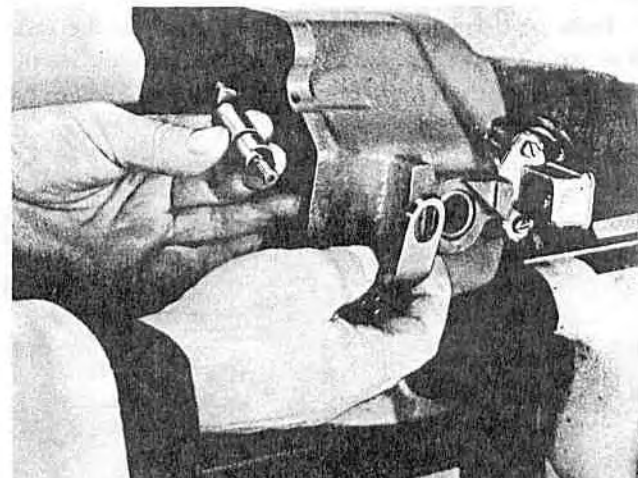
Installing the Overdrive Lockout Lever and Shaft
